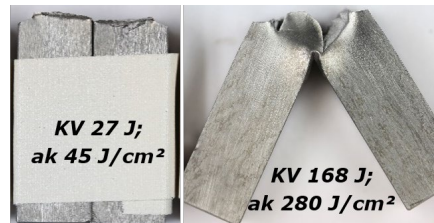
Charpy impact samples tested: brittle fracture (left) and ductile fracture (right).
